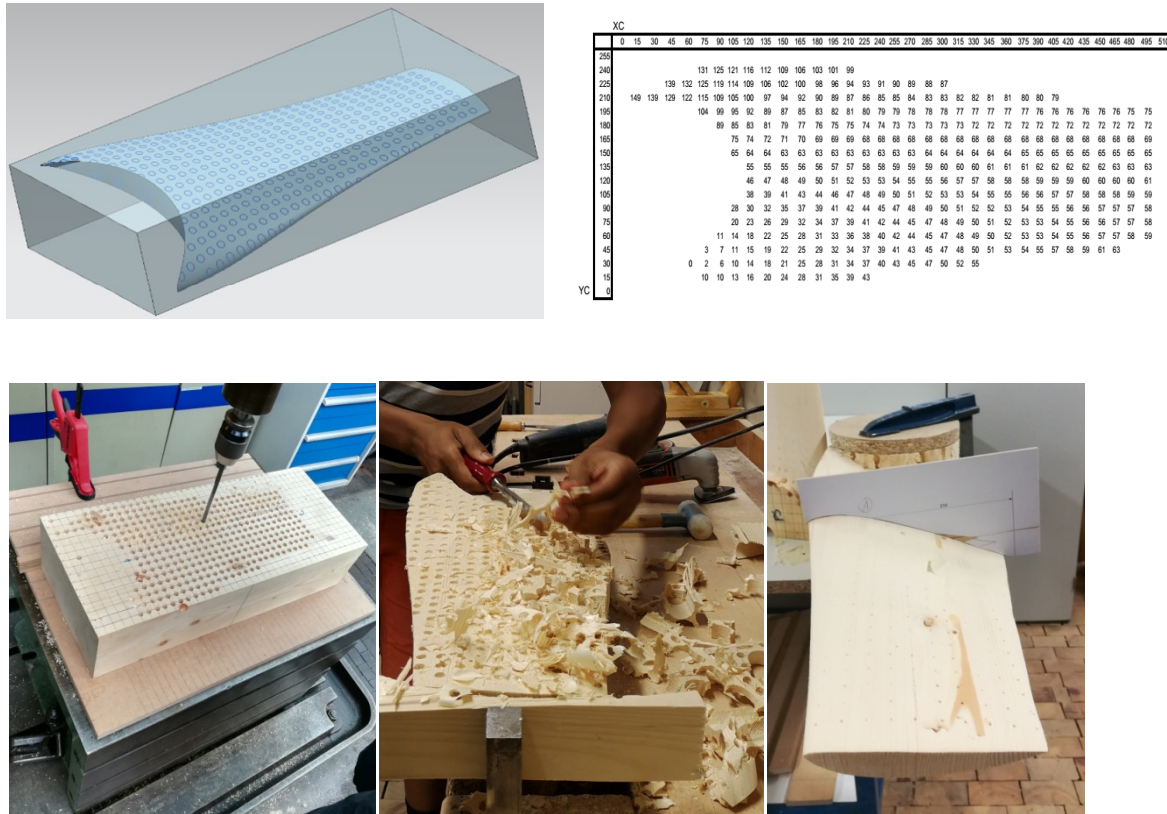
Fabrication of the blades; upper: 3D CAD model and drilling plan; lower: wood block to blade process.
